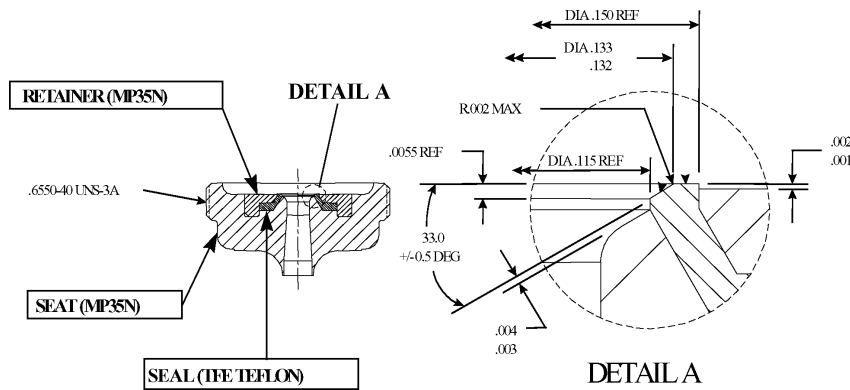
Final RPOV seat assembly design configuration (all dimensions are in inches).
